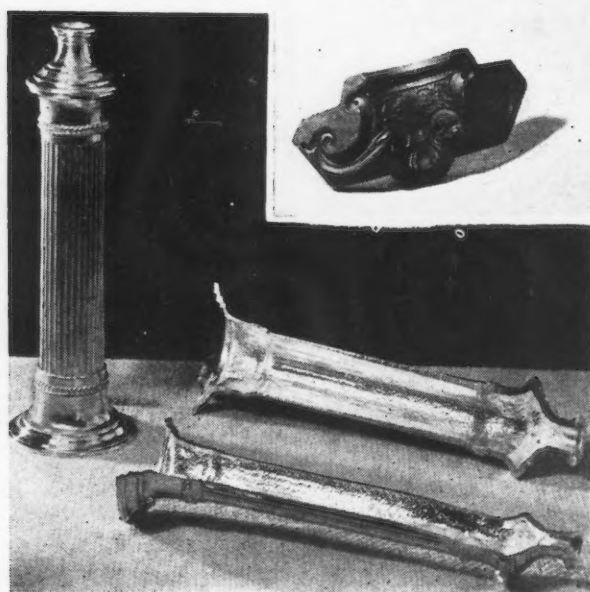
Two bronze permanent molds are shown here. The mold in the top view is made in several pieces, each cast from the plaster patterns shown to the right. The zinc alloy casting produced in this mold is shown in the center foreground. The lower view shows a bronze mold made from the five similar sections of plaster patterns.
